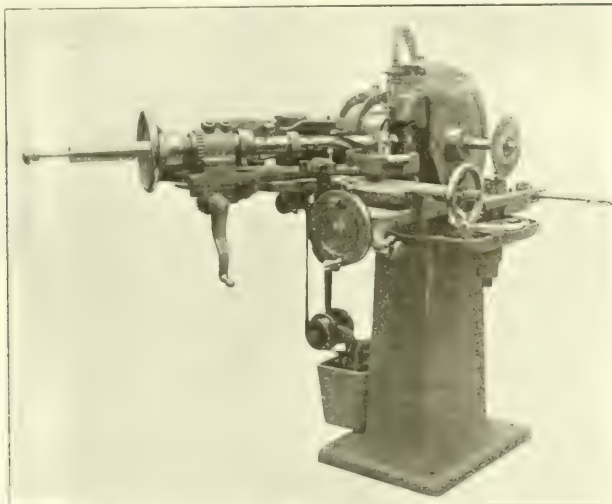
A GENERAL VIEW OF THE WEB THINNING MACHINE
